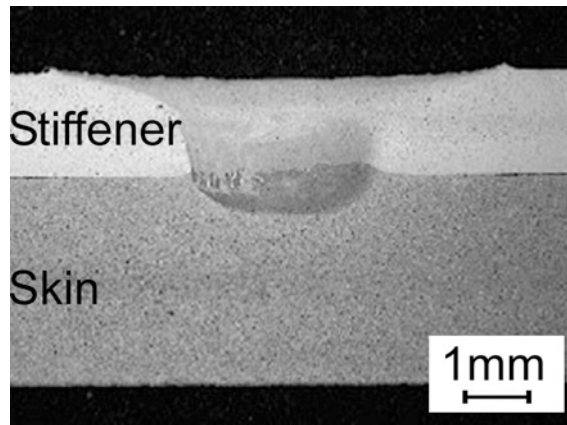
Macrograph of skin-stringer joint. Macrograph of specimen skin-stiffener lap welded joint.
